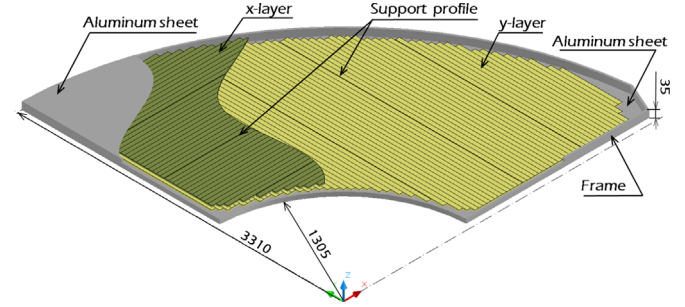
Schematic view of one superlayer formed by scintillator strips. Sizes are given in mm.
